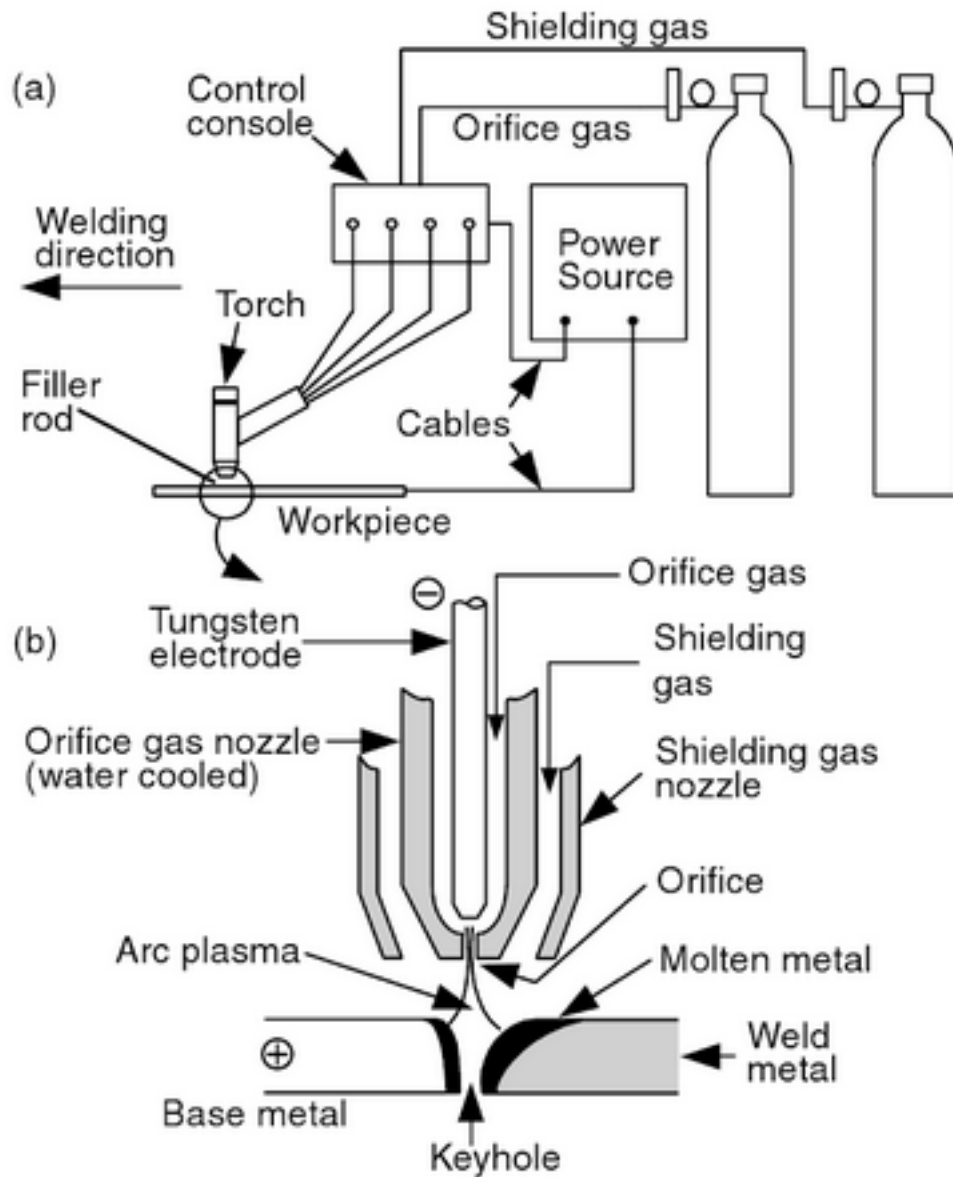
(a) Wiring diagram of Plasma Arc Welding. (b) Internal components of PAW torch [46].
